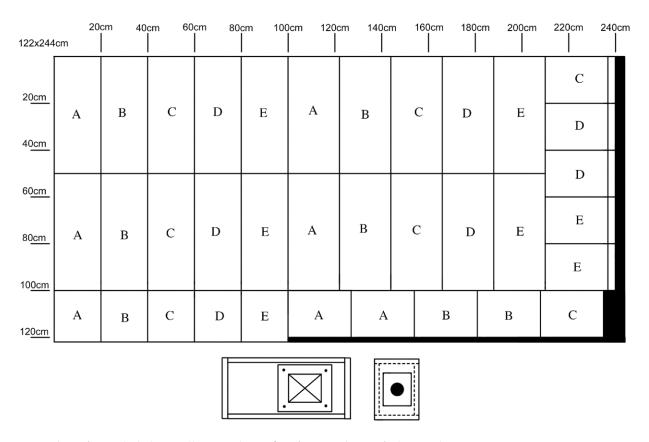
Plans for a slightly smaller nest box (five from a sheet of plywood).
